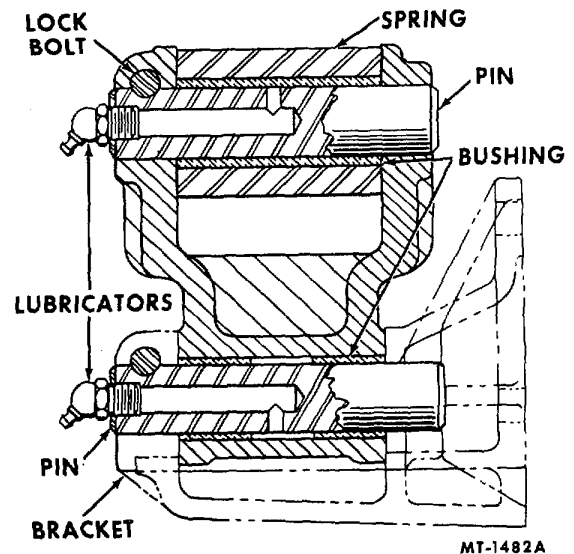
Lubricated Spring Shackle (Driven-in type spring pin).
